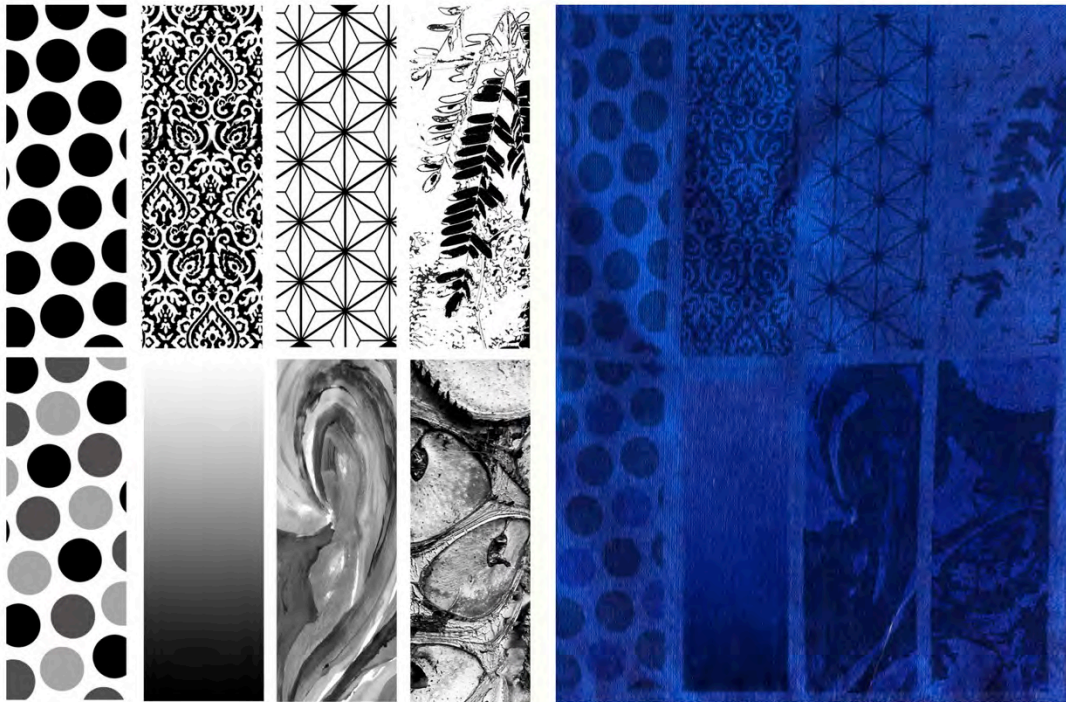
Laser marking test sheet as a CAD and processed on a wool textile sample.
